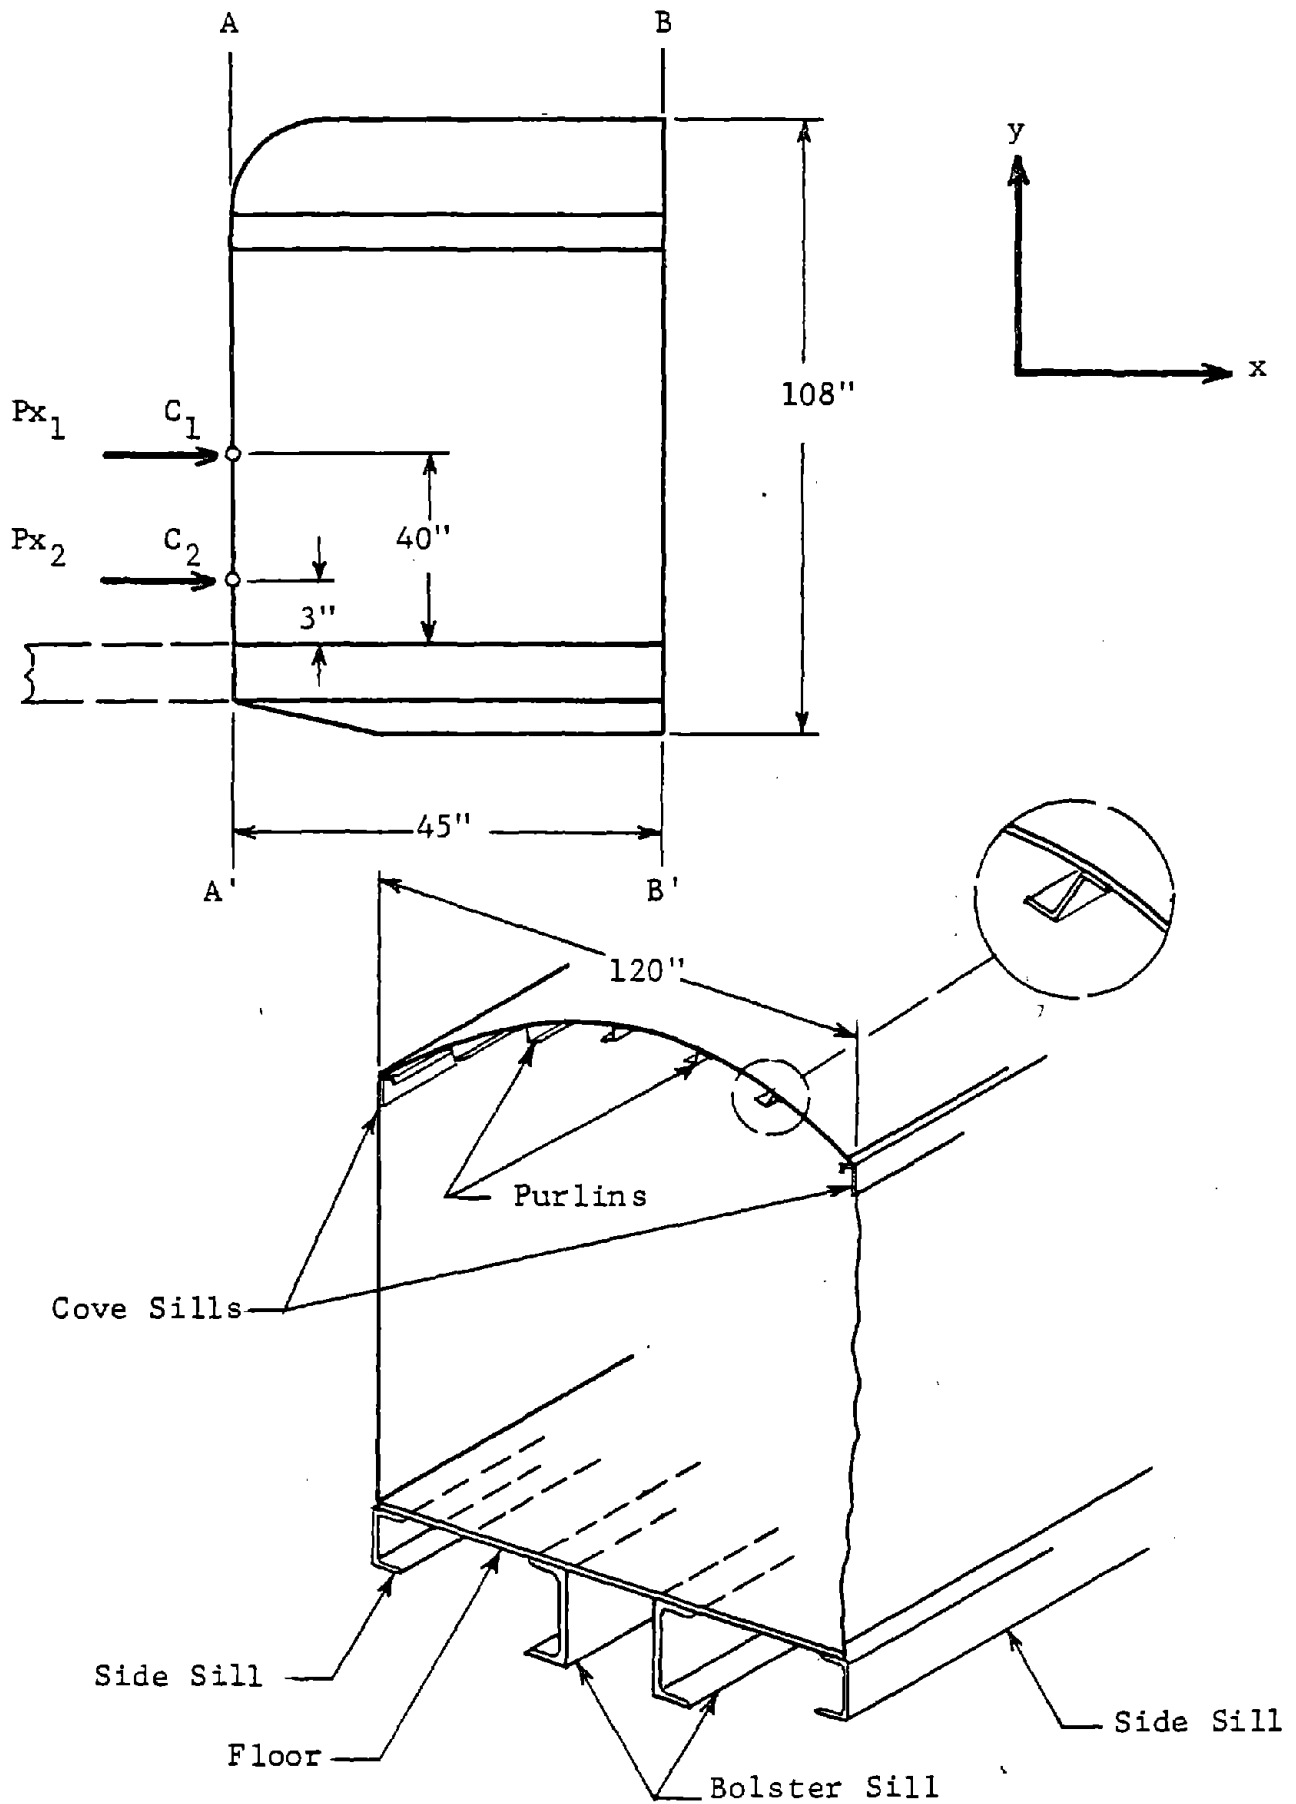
END OF CAR SUPERSTRUCTURE SUBASSEMBLY
